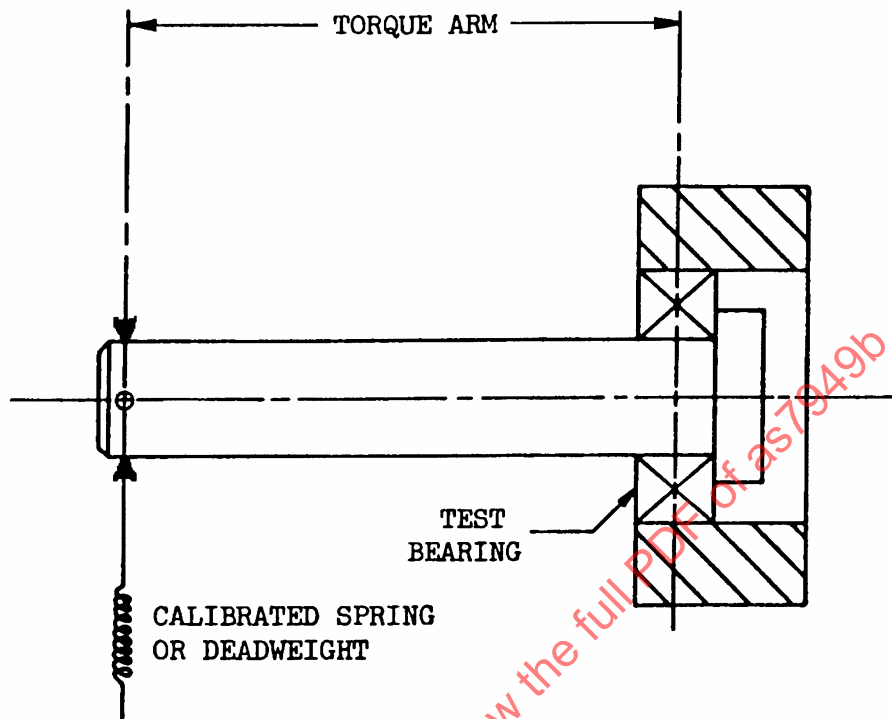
Test Fixture Used to Determine Torque Required to Dislodge Seal in Bearing
